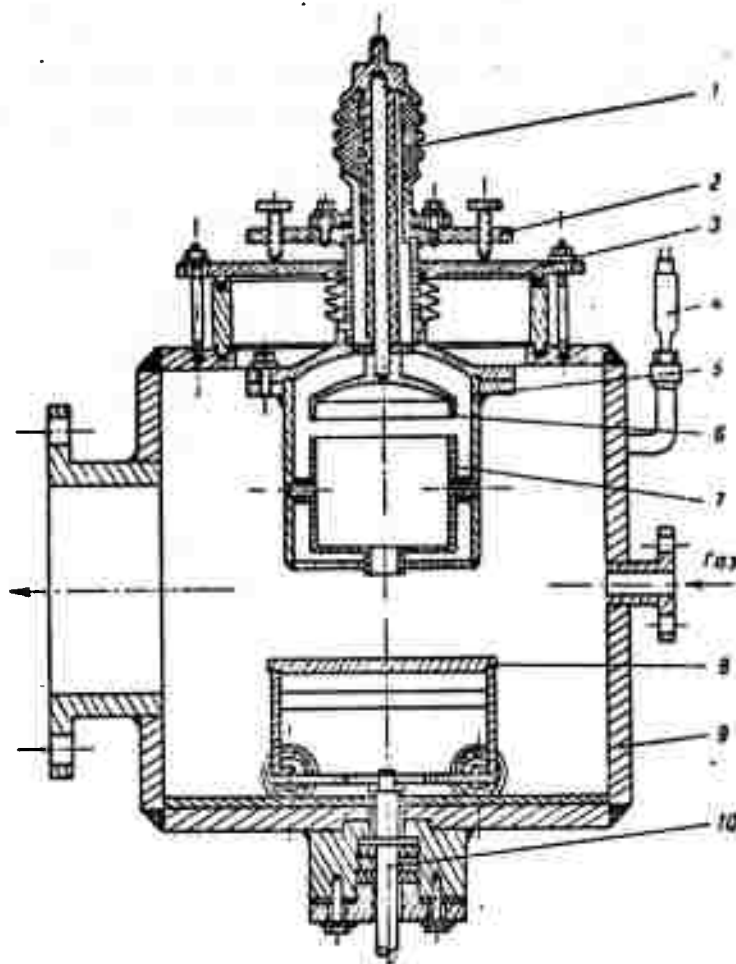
Working chamber and gas discharge electron source. 1 - high voltage, 2 - adjusting device, 3 - flange, 4 - manometer, 5 - anode, 6 - cathode, 7 - control electrode, 8 - sliding table, 9 - vacuum chamber, 10 - drive for shifting specimens.
